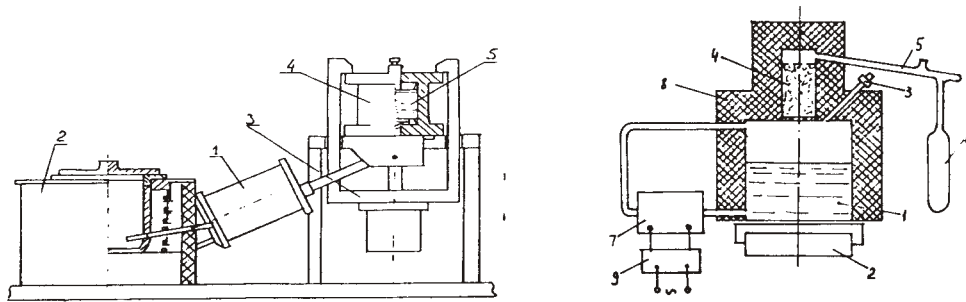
Scheme of experimental stand for motor rotor potting. 1 – MHD pump; 2 – electric furnace; 3 – mechanism for press form locking; 4 – press form; 5 – laminated rotor.
